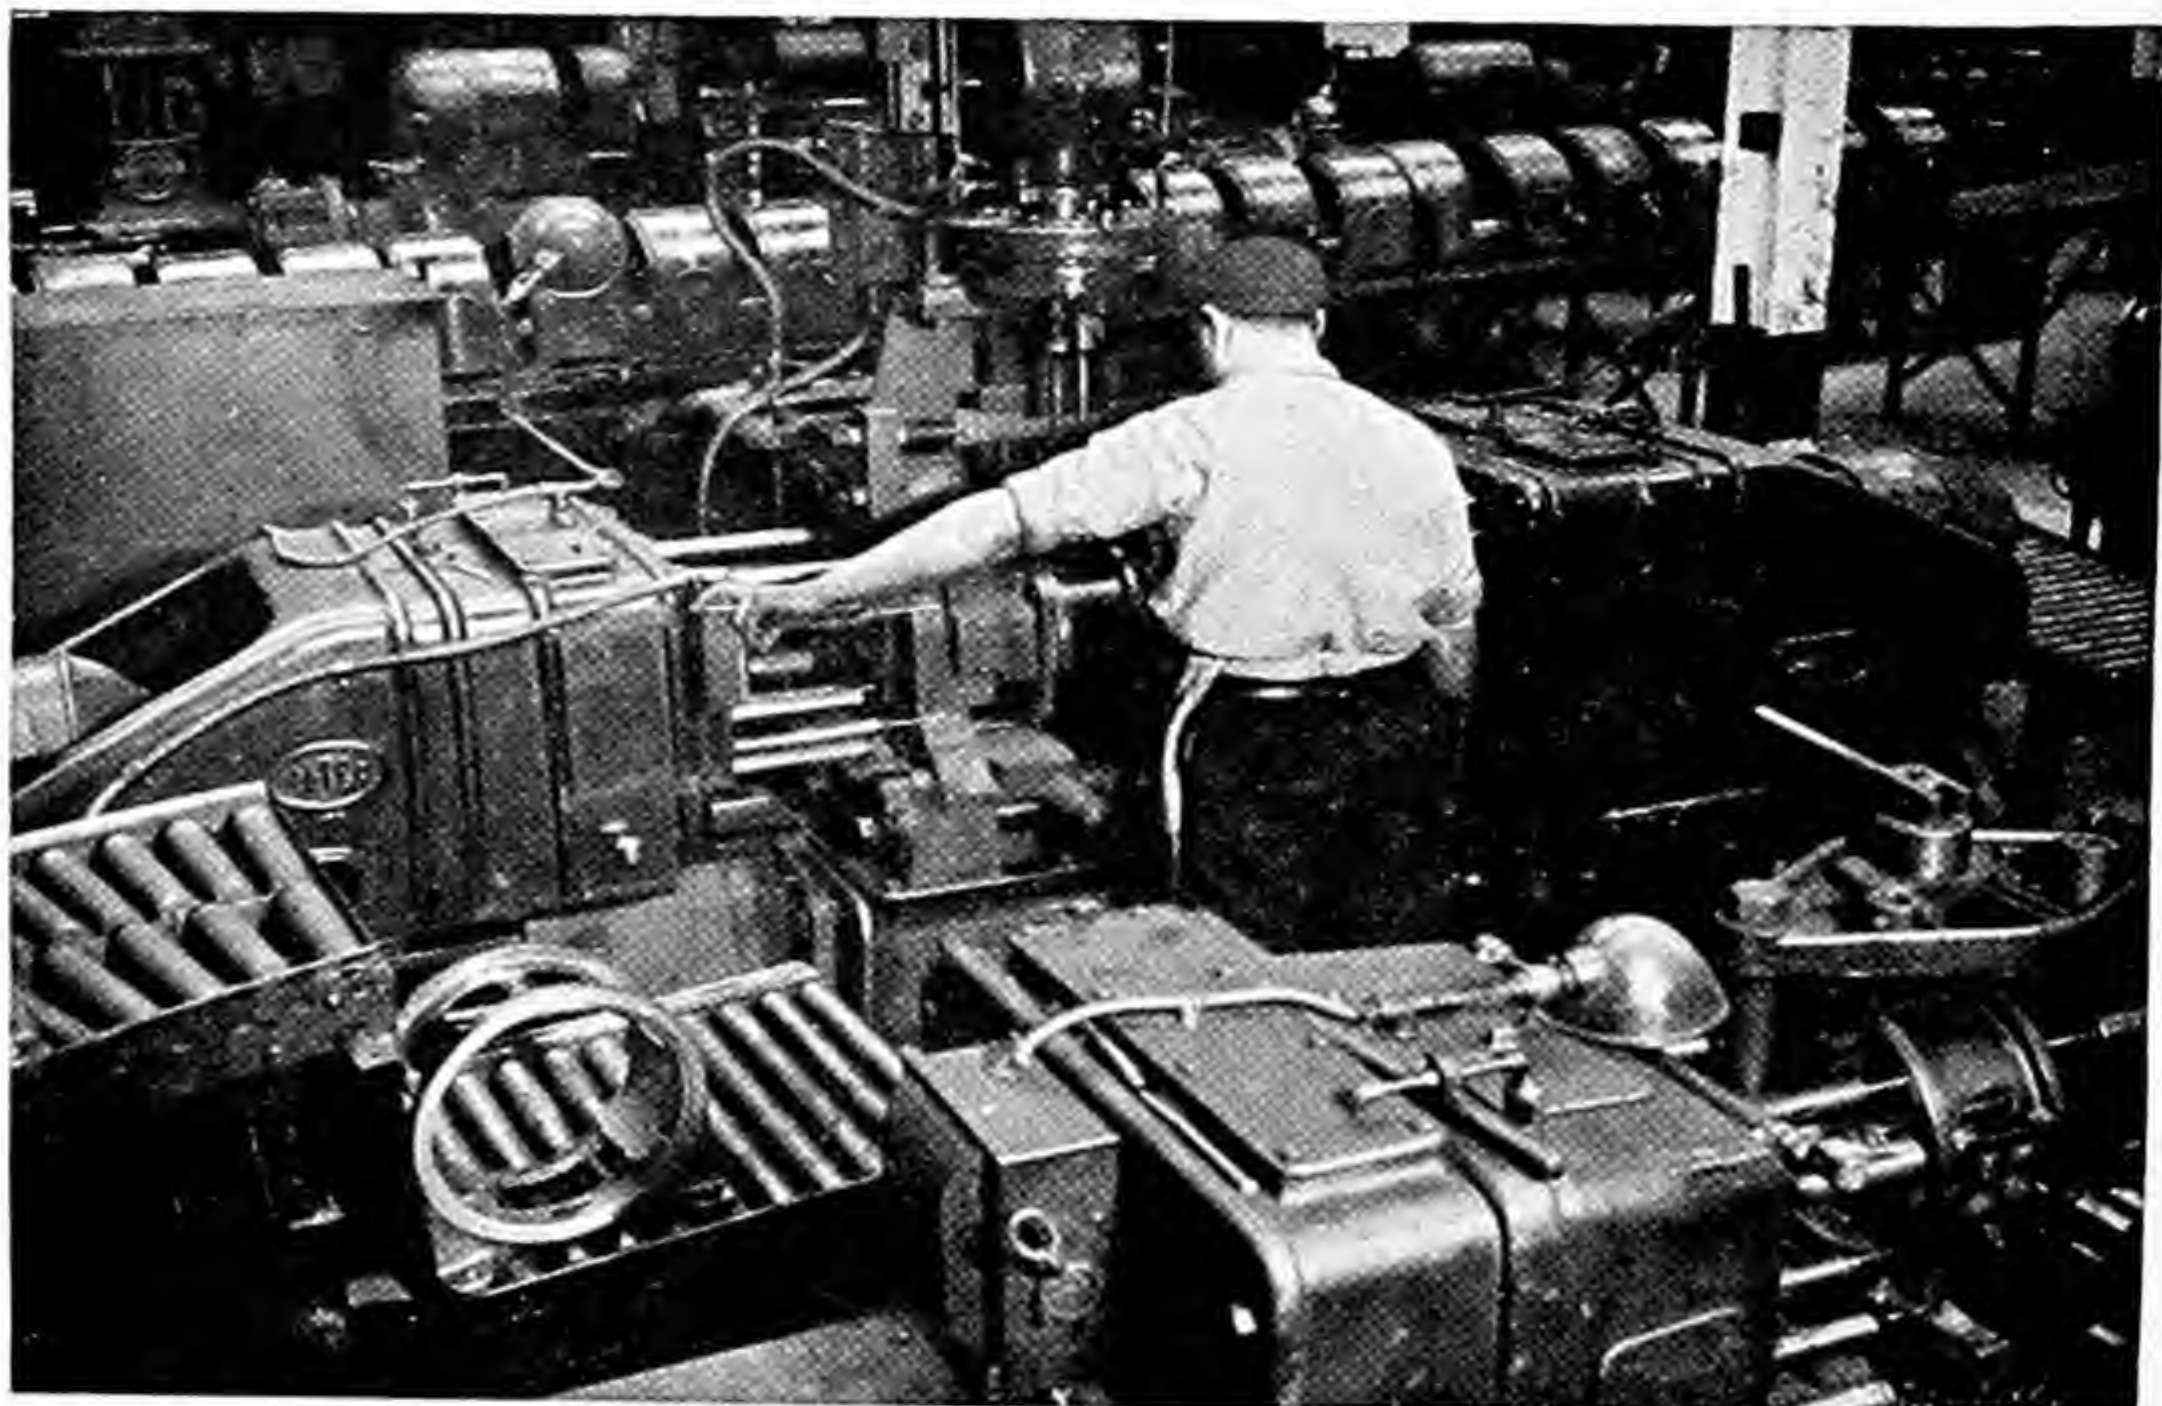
Gravity conveyors used to move material to and from machining operation.
